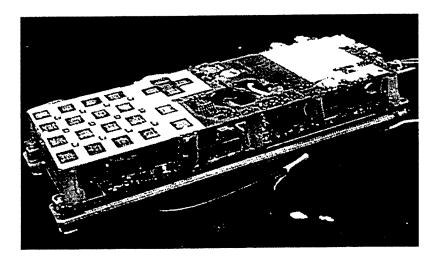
Modified TH-D7 circuit boards that are conformal coated and use staking compound to separate the boards.
